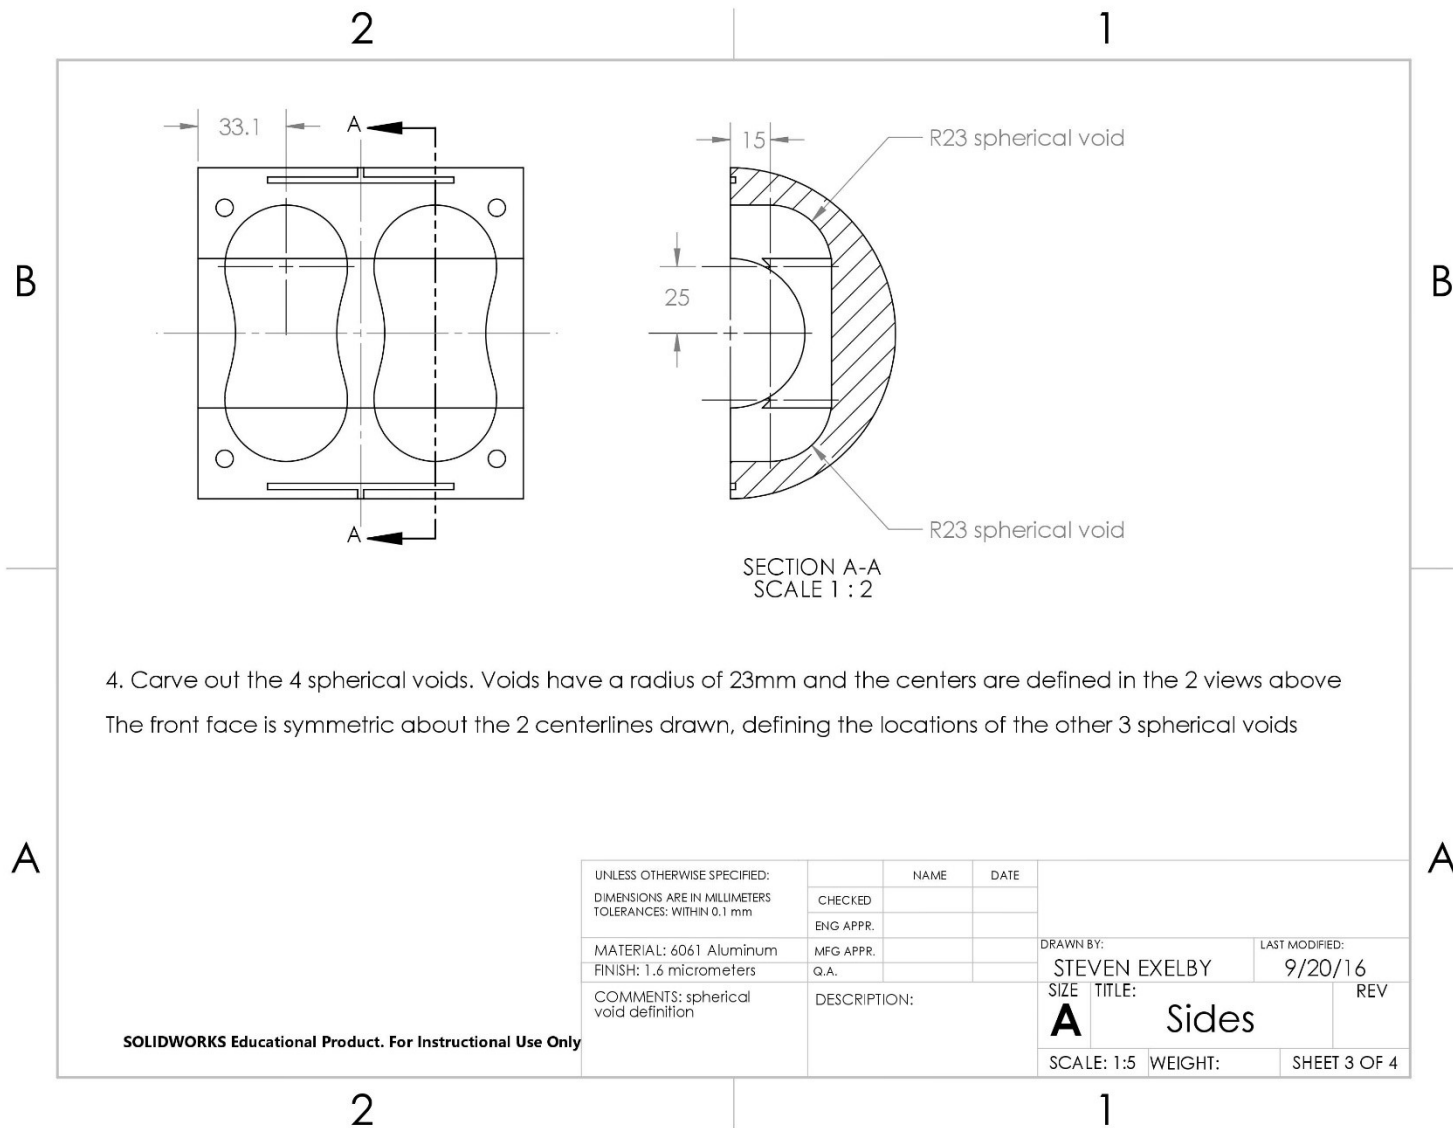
Cylindrical side pieces of the RPCFA inner housing, page 3.
